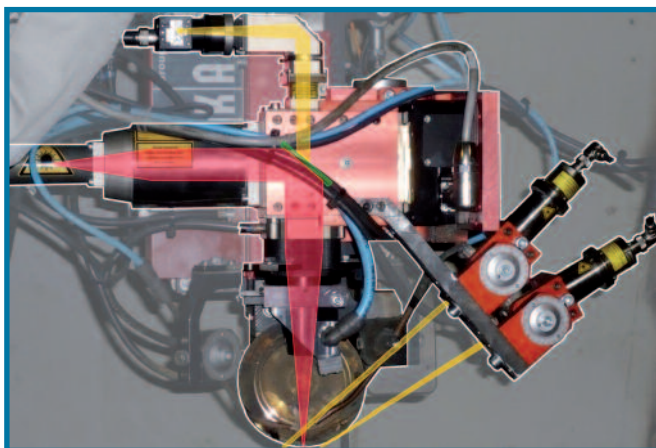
The bi-directional LPF seam tracking system works with two line generators mounted in front of the welding head. Each of these projects a light stripe 3 to 5 mm in front of and behind the laser focus and perpendicular to the welding edge.
